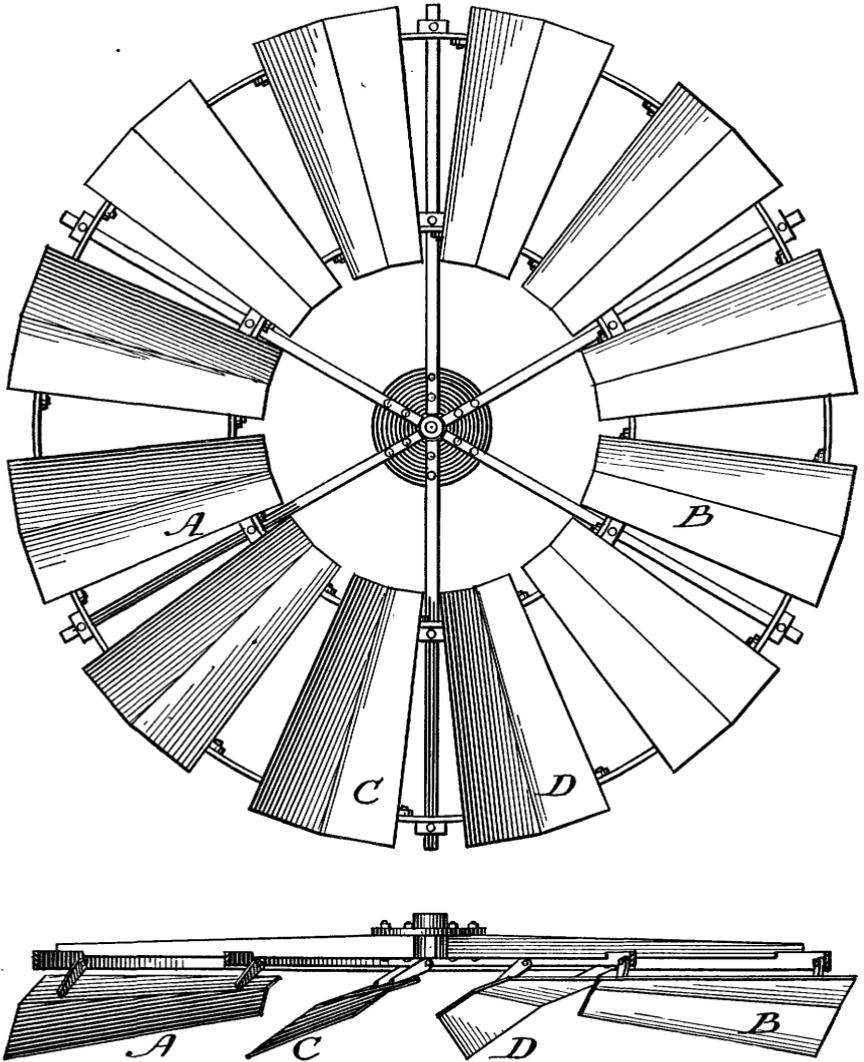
Elevation and section of wheel No. 40. (Sail area, 12,937 square feet; efficiency, 0.213.)
